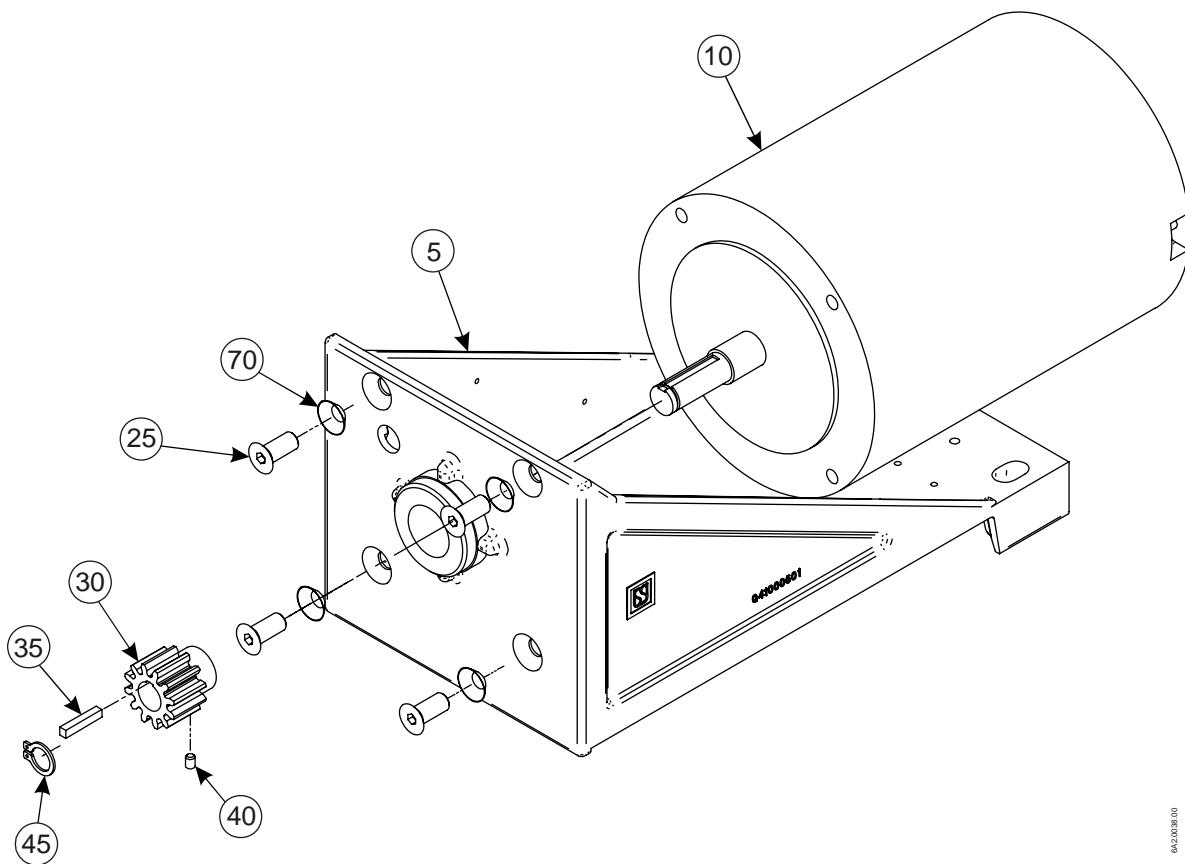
M-3, M-23A, and M-23B “Black” Motor Assembly
